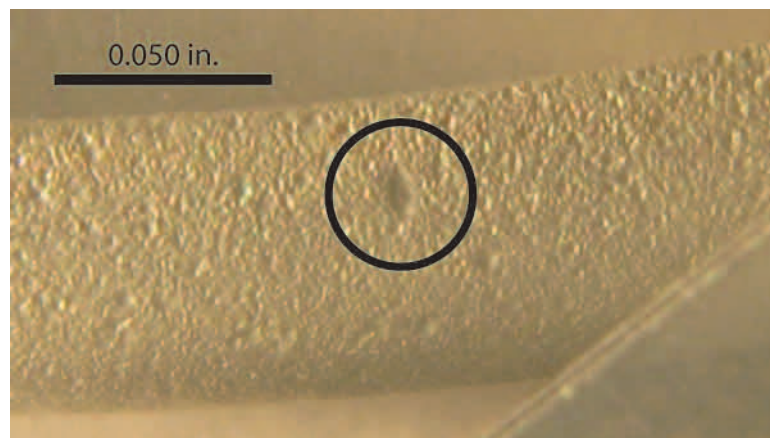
Unused seal showing “moon craters” surface finish. The circled defect, given its size and location on the seal, would likely have caused a leak if this seal had been installed.
